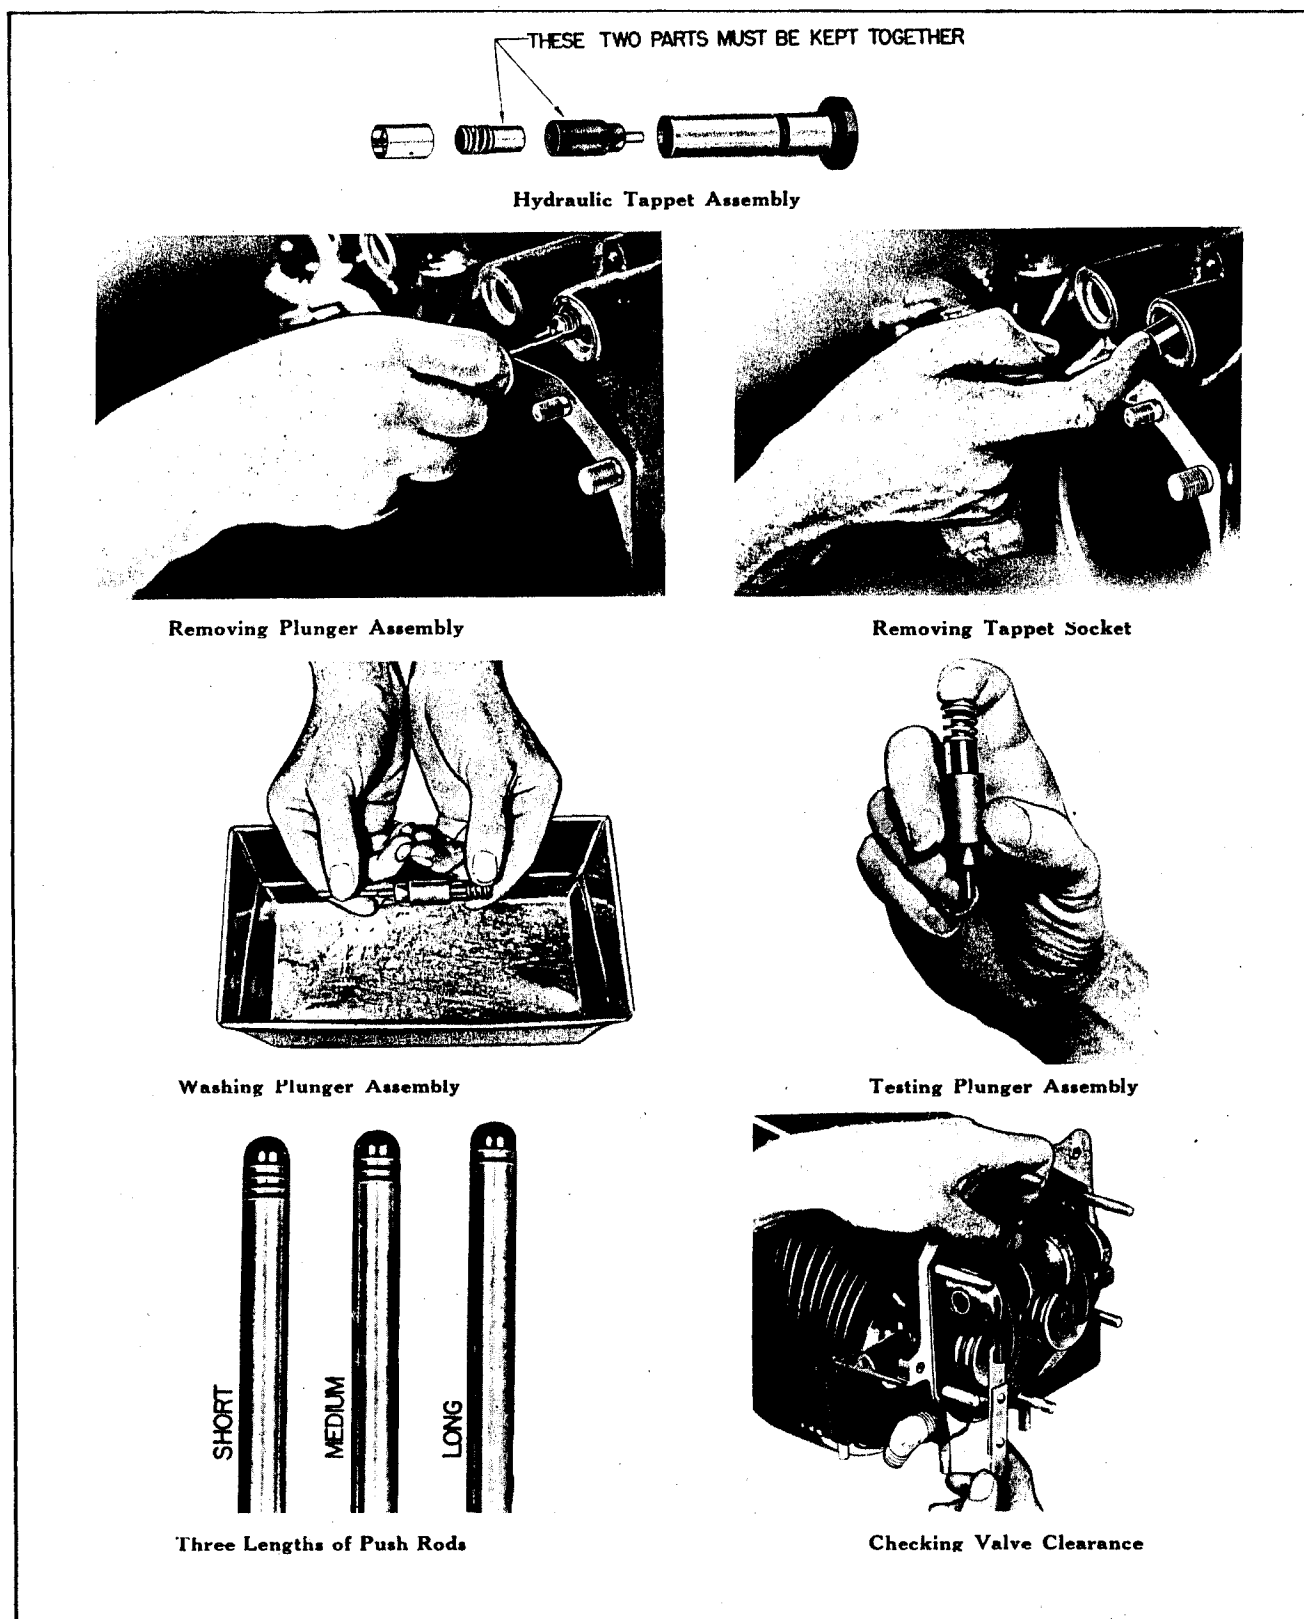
Hydraulic Tappet—Disassembly, Cleaning, and Inspection
